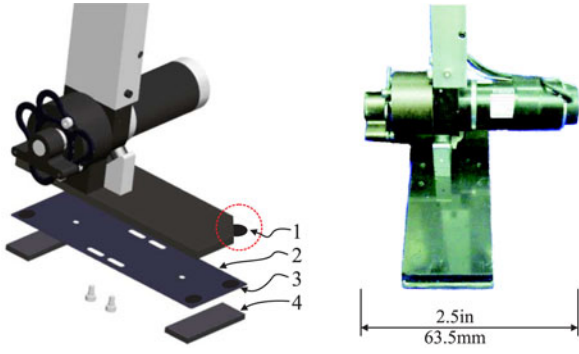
(Left) CAD model—exploded view of the foot: 1) FSR sensor; 2) foot plate; 3) sensor touch pad; 4) rubber foot contact-pad. (Right) Foot of the robot.
